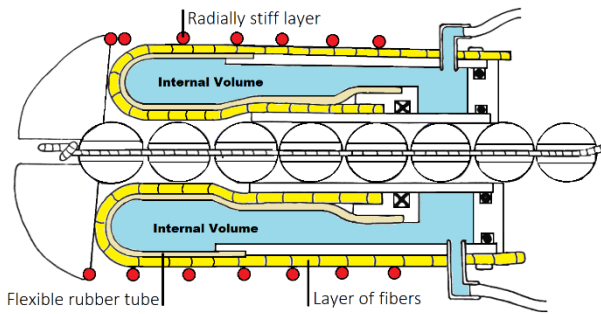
Longitudinal section view showing the three layers of the shaft. The internal inverted flexible rubber tube (beige) the intermediate layer of fibers (yellow) and the external radially stiff spring (red).
